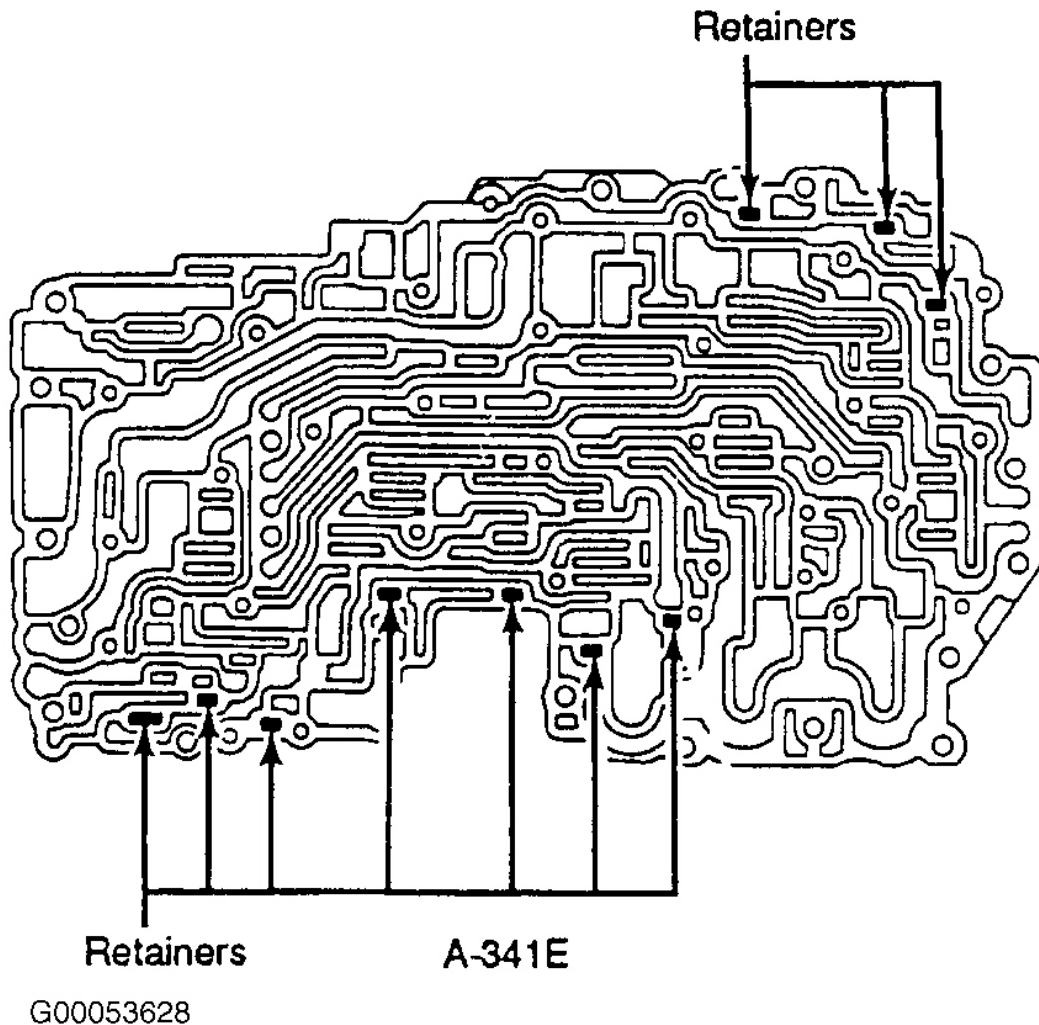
Locating Lower Valve Body Retainers (A-341E)
